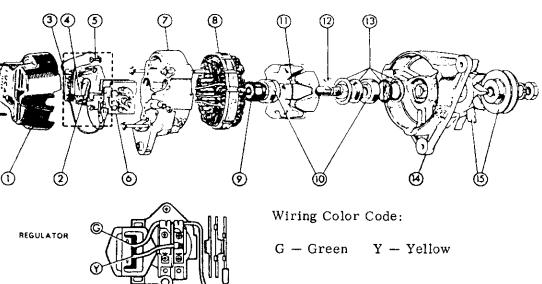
Lucas alternator used on late Series 364 and all Series 384.
